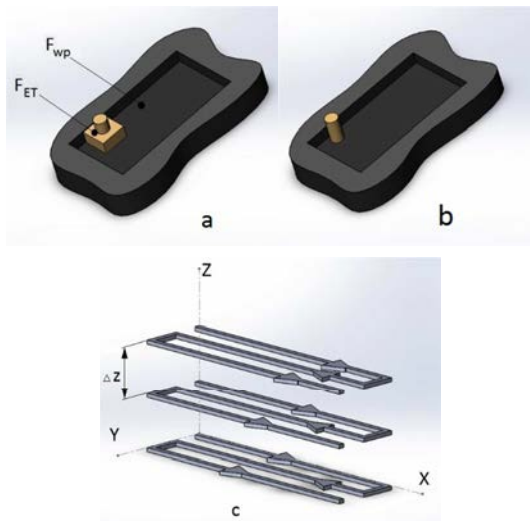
The technological scheme of the dimensional ECM unshaped (b) and partially shaped (a) electrode-tool; (c) the cyclogram of the electrode-tool displacement.
